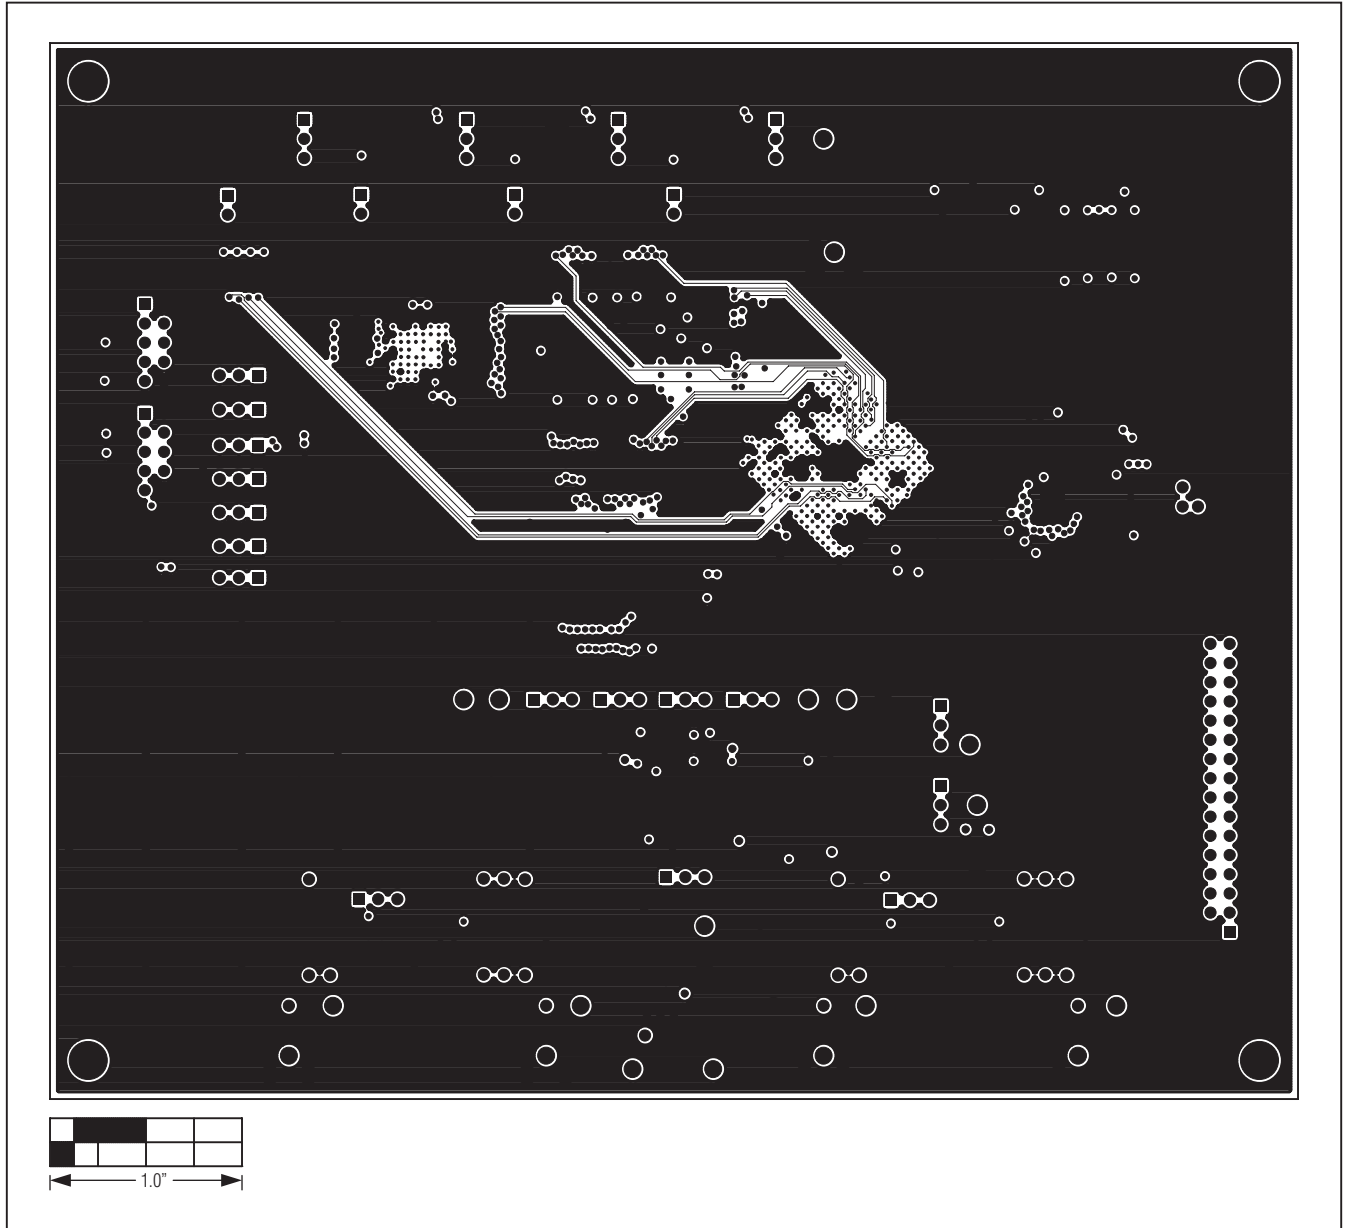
MAX11666 EV Kit PCB Layout—Layer 9
